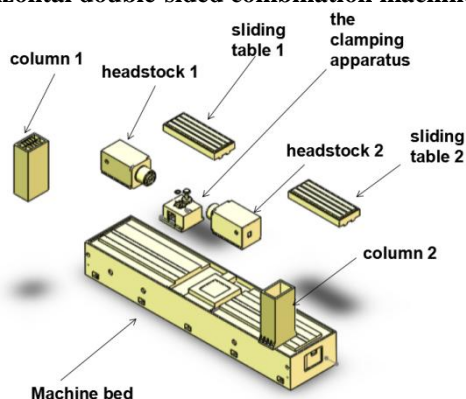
Explosive drawing of Horizontal double-sided combination machine
